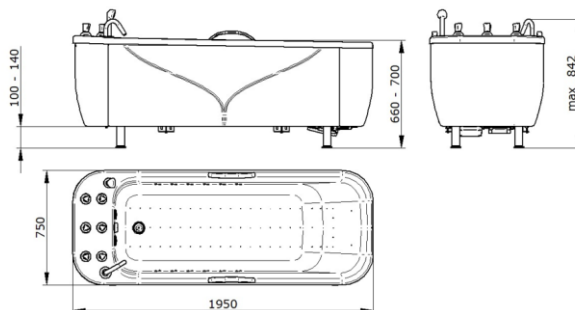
Bathtub BALMED ECO and STANDARD 300 I (dimensions in mm)
